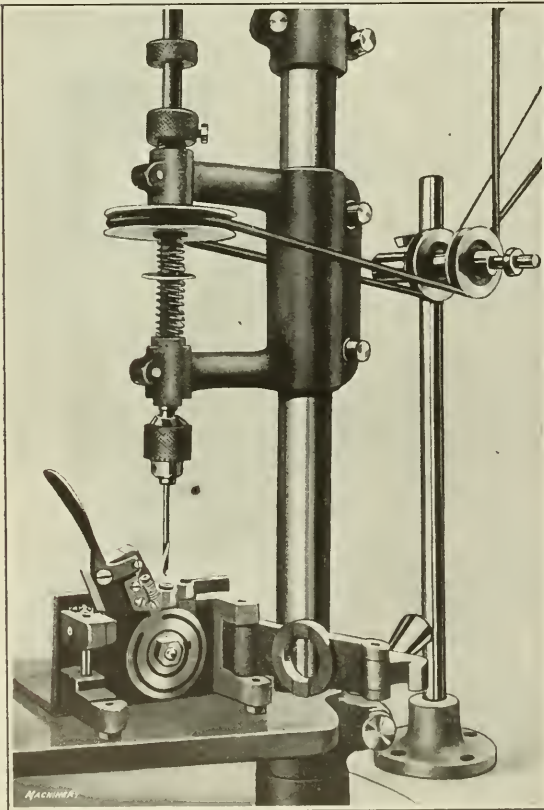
Machine and Latch Jig used for drilling Setting Pin Hole
